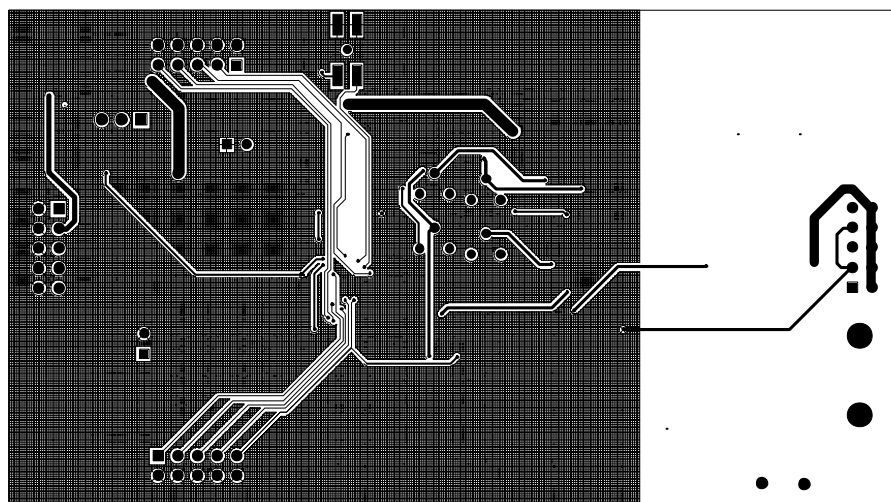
Si321xMDC-EVB with Discretes Solder Side
